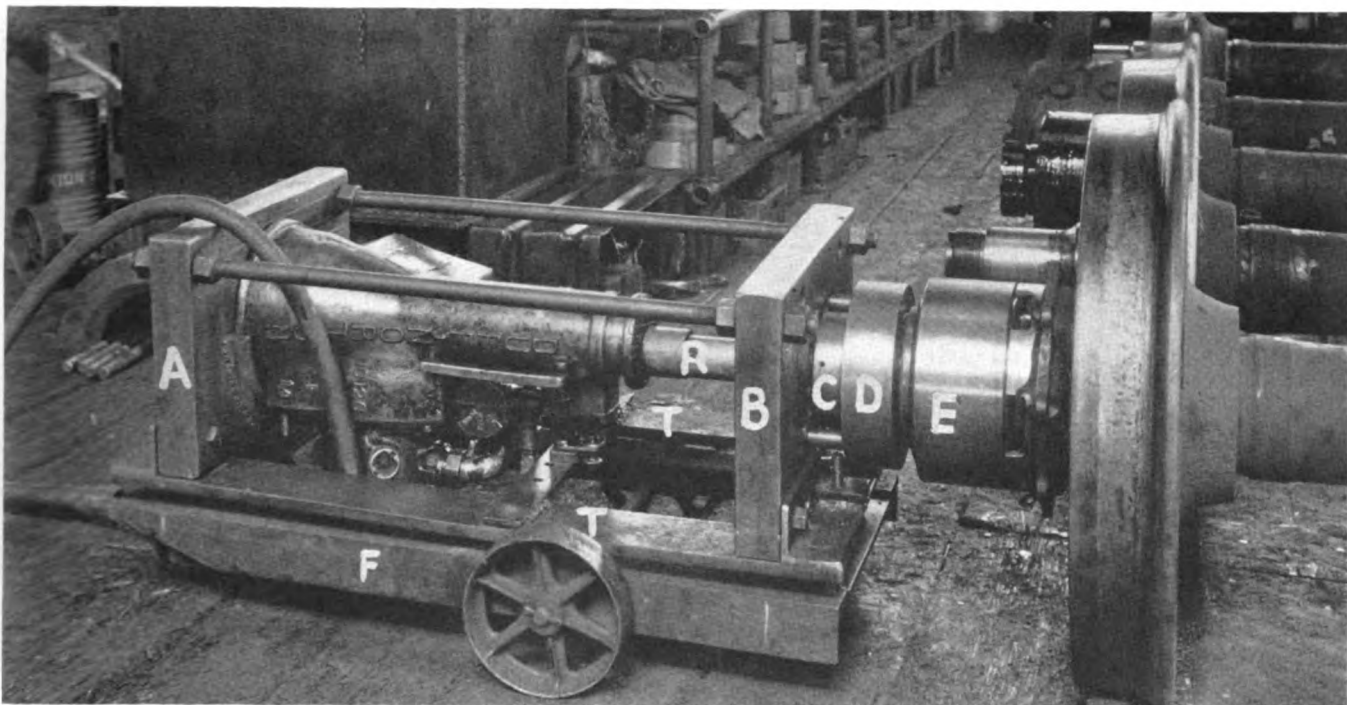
Roller-bearing puller, set up to remove the Timken taper sleeve which releases the outer cone and the double cup
